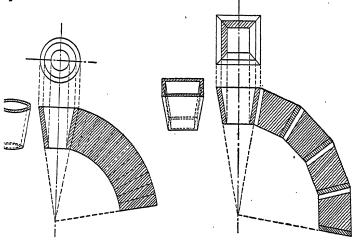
Pattern for a frustum of a Fig. 60.—Pattern for a frustum of a hollow cone hollow pyramid
